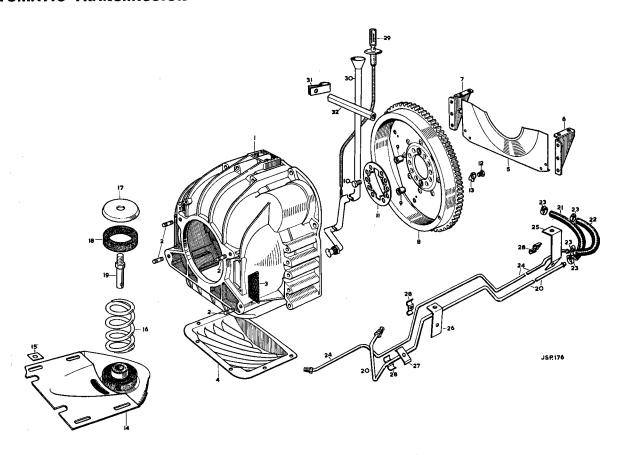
Exploded view of the converter housing and transmission mounting
